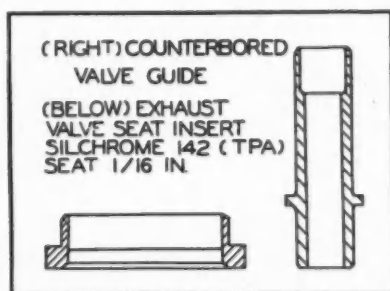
Valve guide and exhaust valve seat insert used in test of light aircraft engine.
